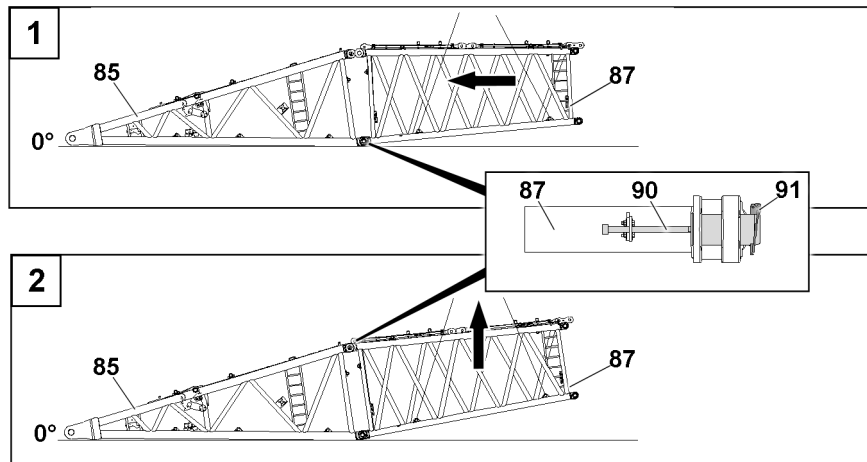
Assembling the W-pivot section, 6 m SL-reducer
